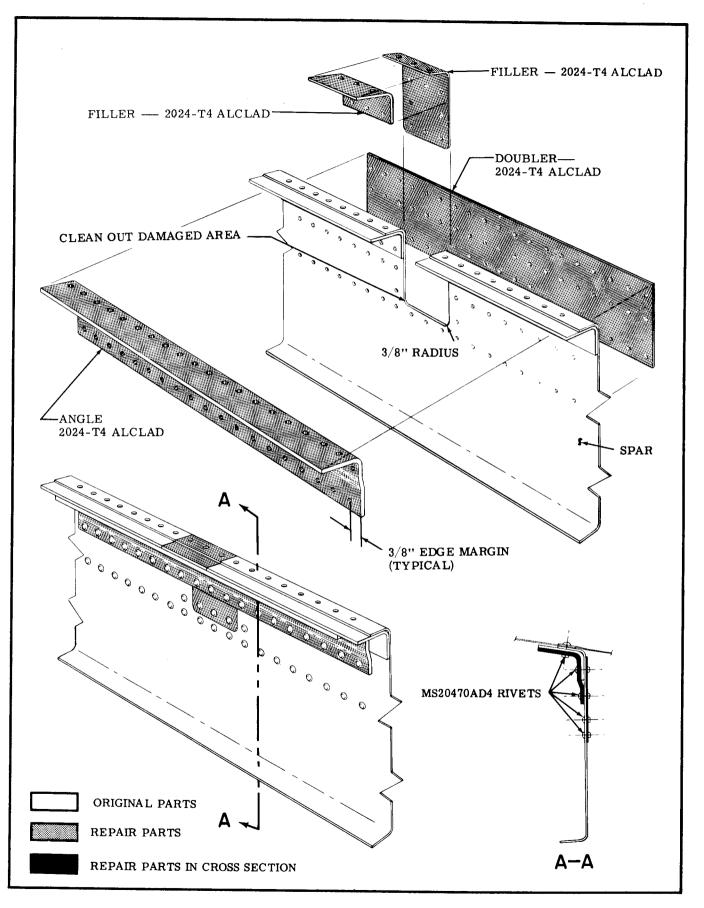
Wing Spar Repair (Sheet 1 of 3)
